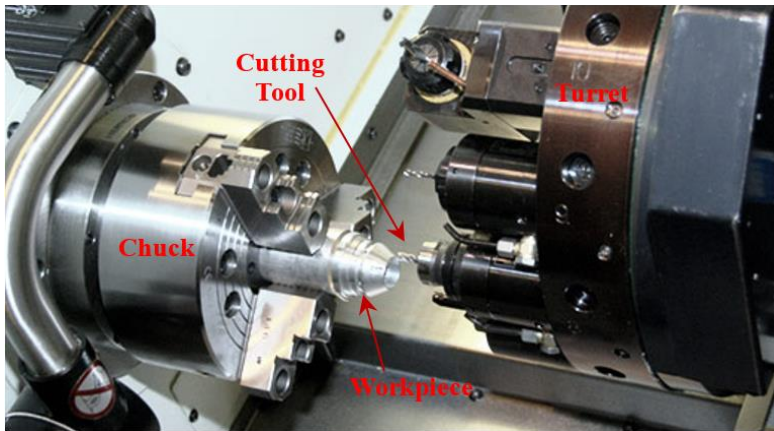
Typical machining operation performed by a CNC Lathe machine.
